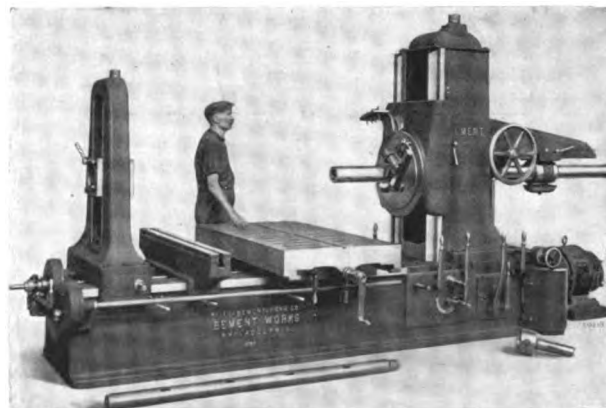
Duplex Control Horizontal Boring, Drilling and Milling Machine
